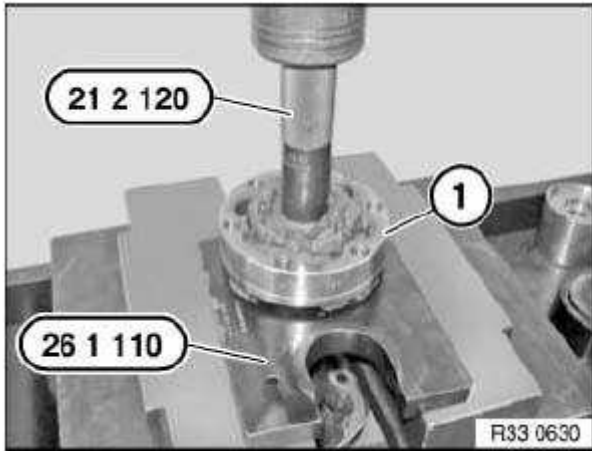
Special Tool (21 2 120) And (26 1 110)
